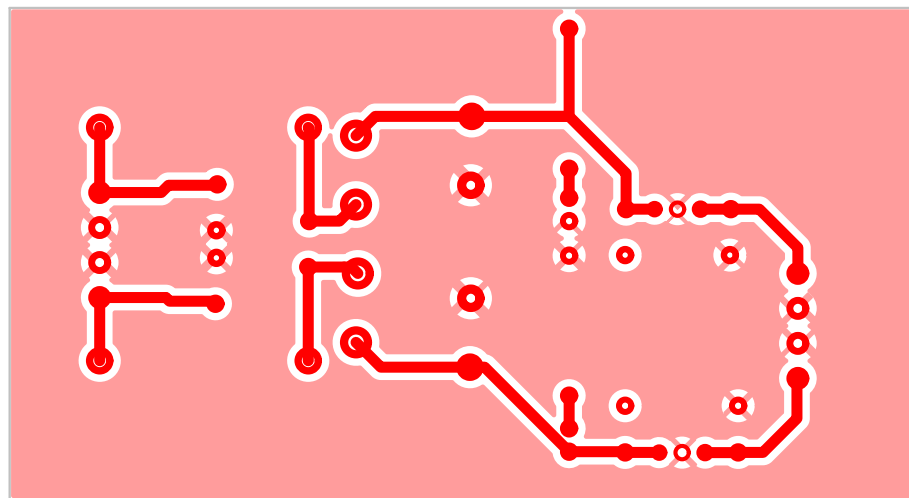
$\pm 12V$ DC power supply board layout bottom view.
